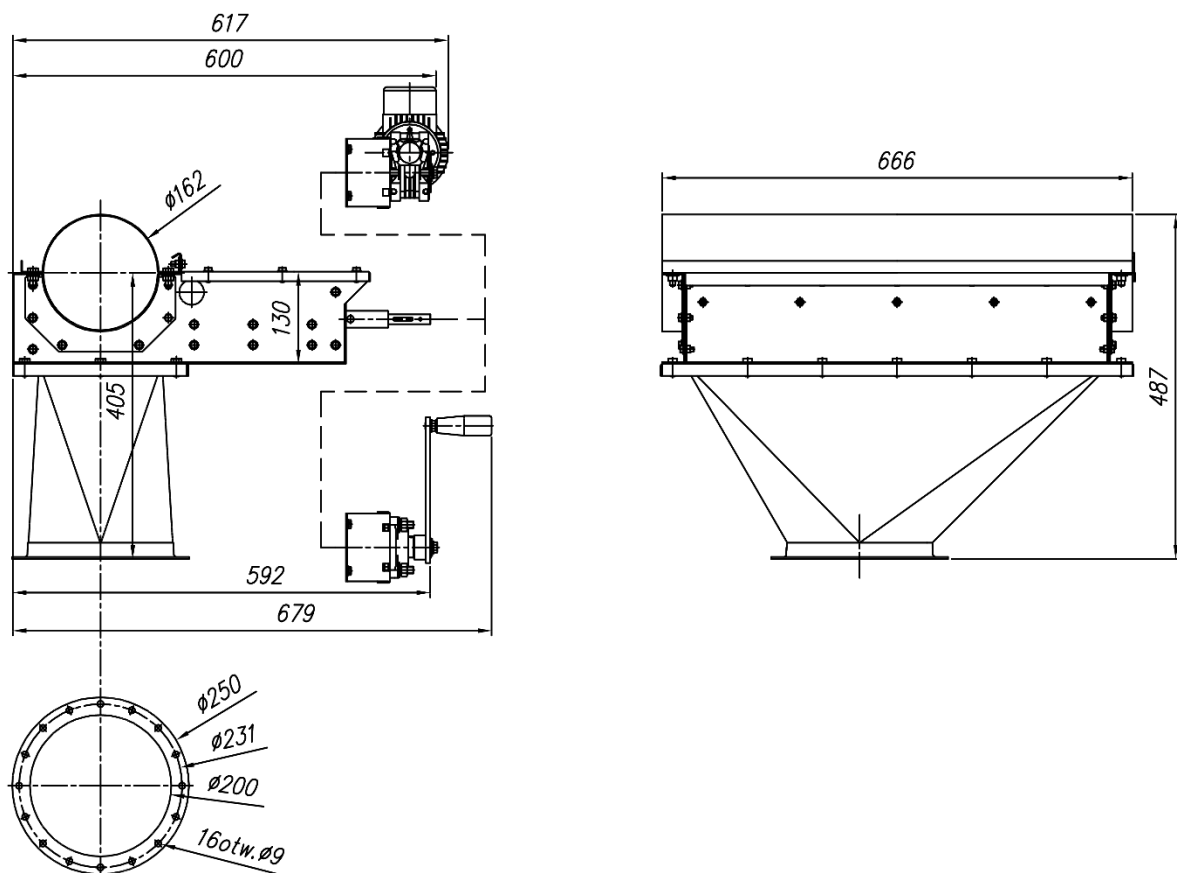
Basic installation dimensions of PSX160-ZAS/... shutters. (dimensions as mm).
